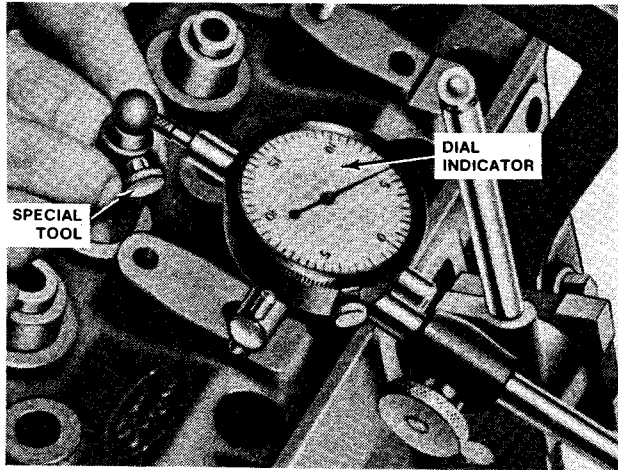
Checking Valve Stem-to-Guide Clearance—Typical
